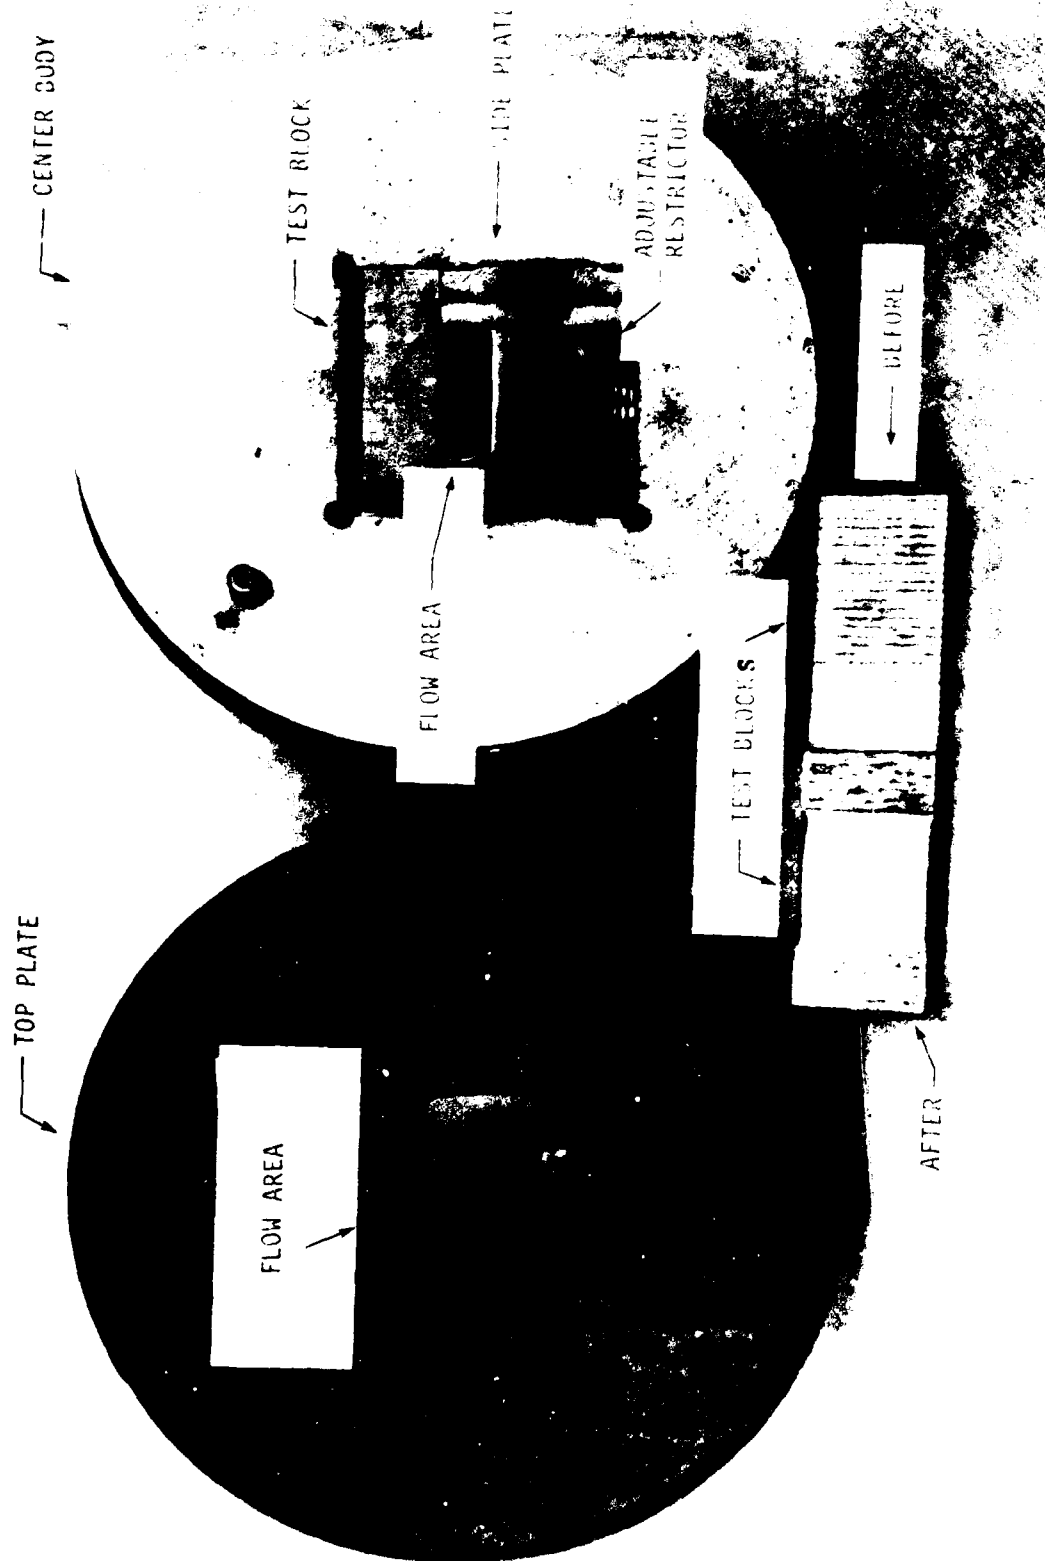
Abrasive Flow Machine (AFM) and Test Block.
